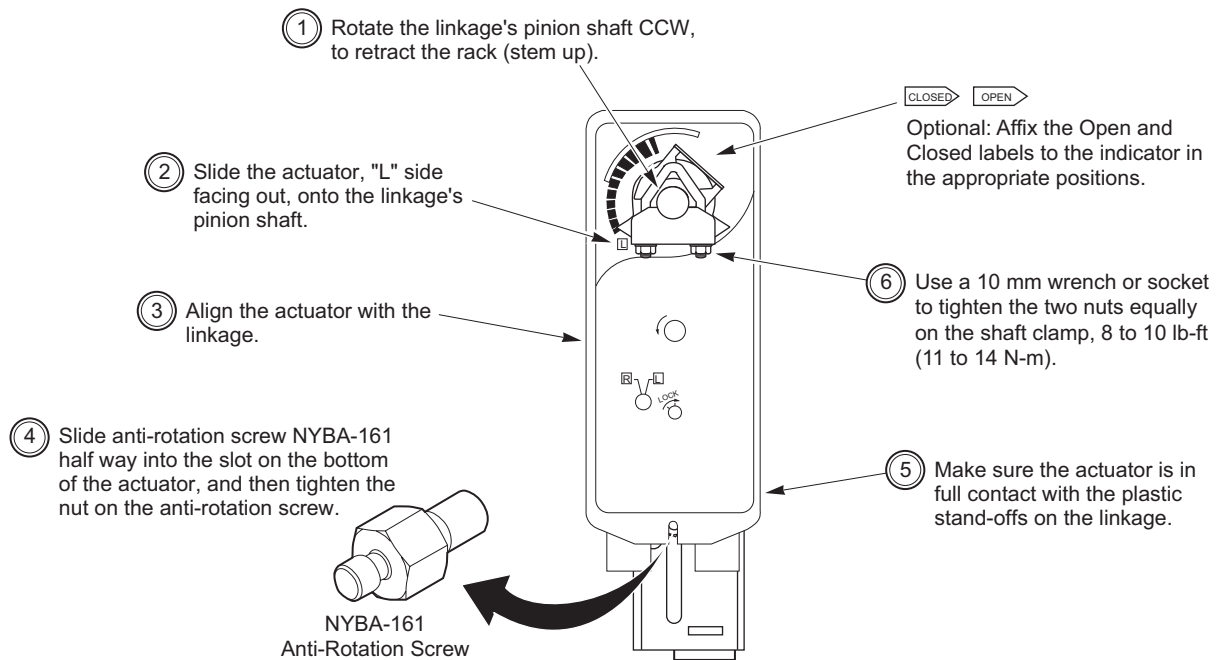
Mounting MX41-707X or MX41-715X and Setting Up Actuator/Linkage/Valve Assembly.
